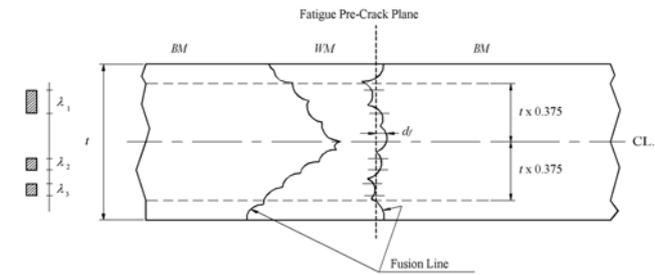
Cross-section through the weld 图13: 焊缝截面图
